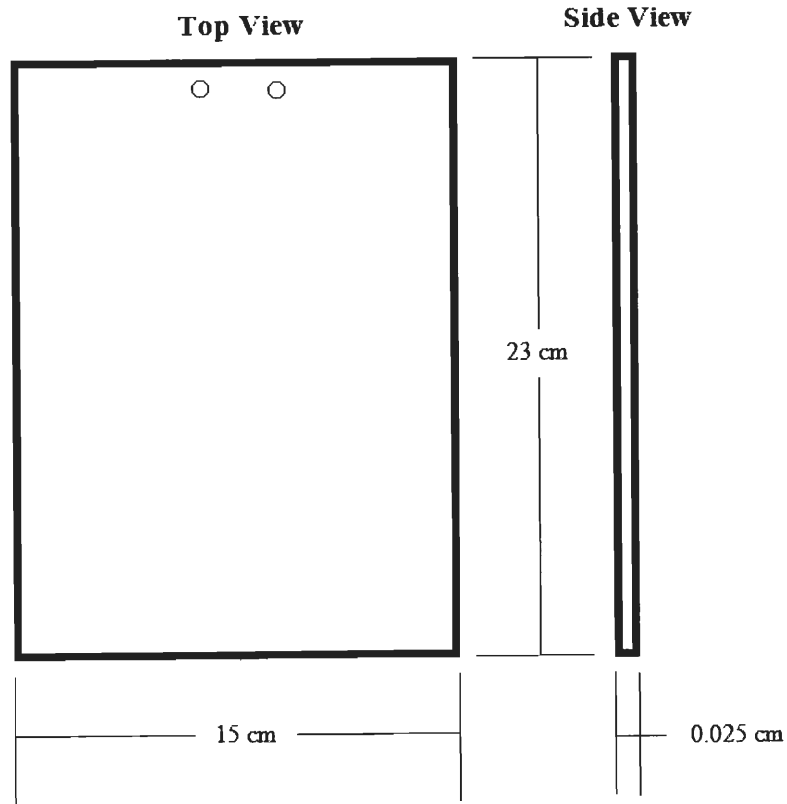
Top and side view of wing geometry. All plates started with these dimensions and were bent accordingly
